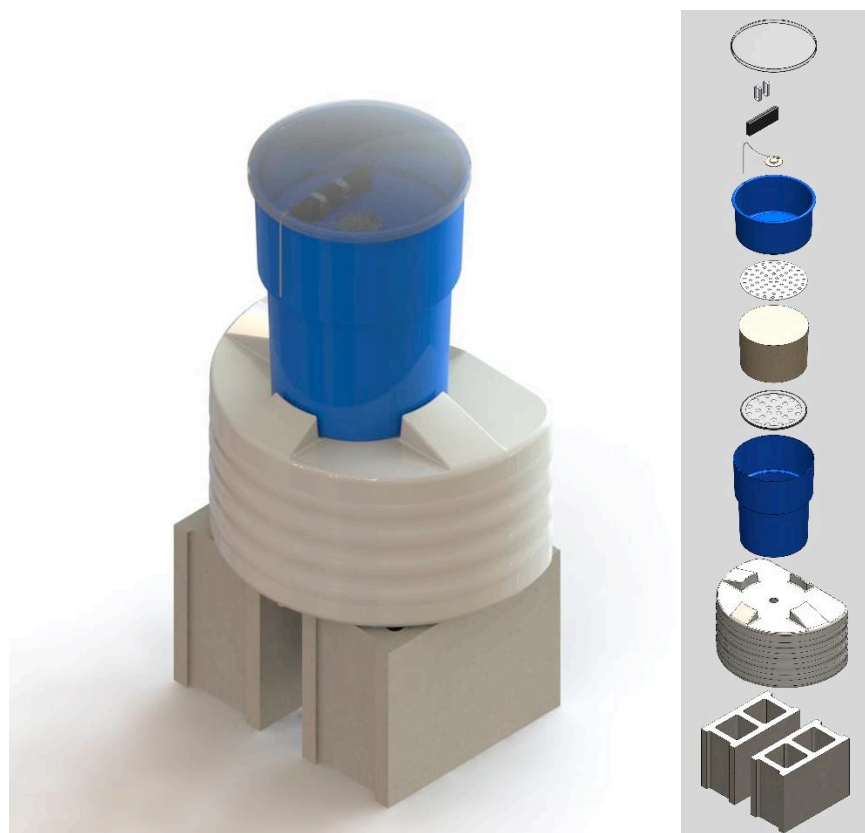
Assembled device and exploded diagram detailing each component of the SafaPani design.
